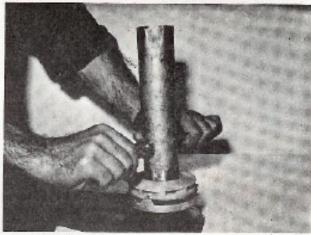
Using the drive pulley clamp #2 to hold the clutch cover, loosen and remove the main retaining nut with Tool/Wrench #4.
